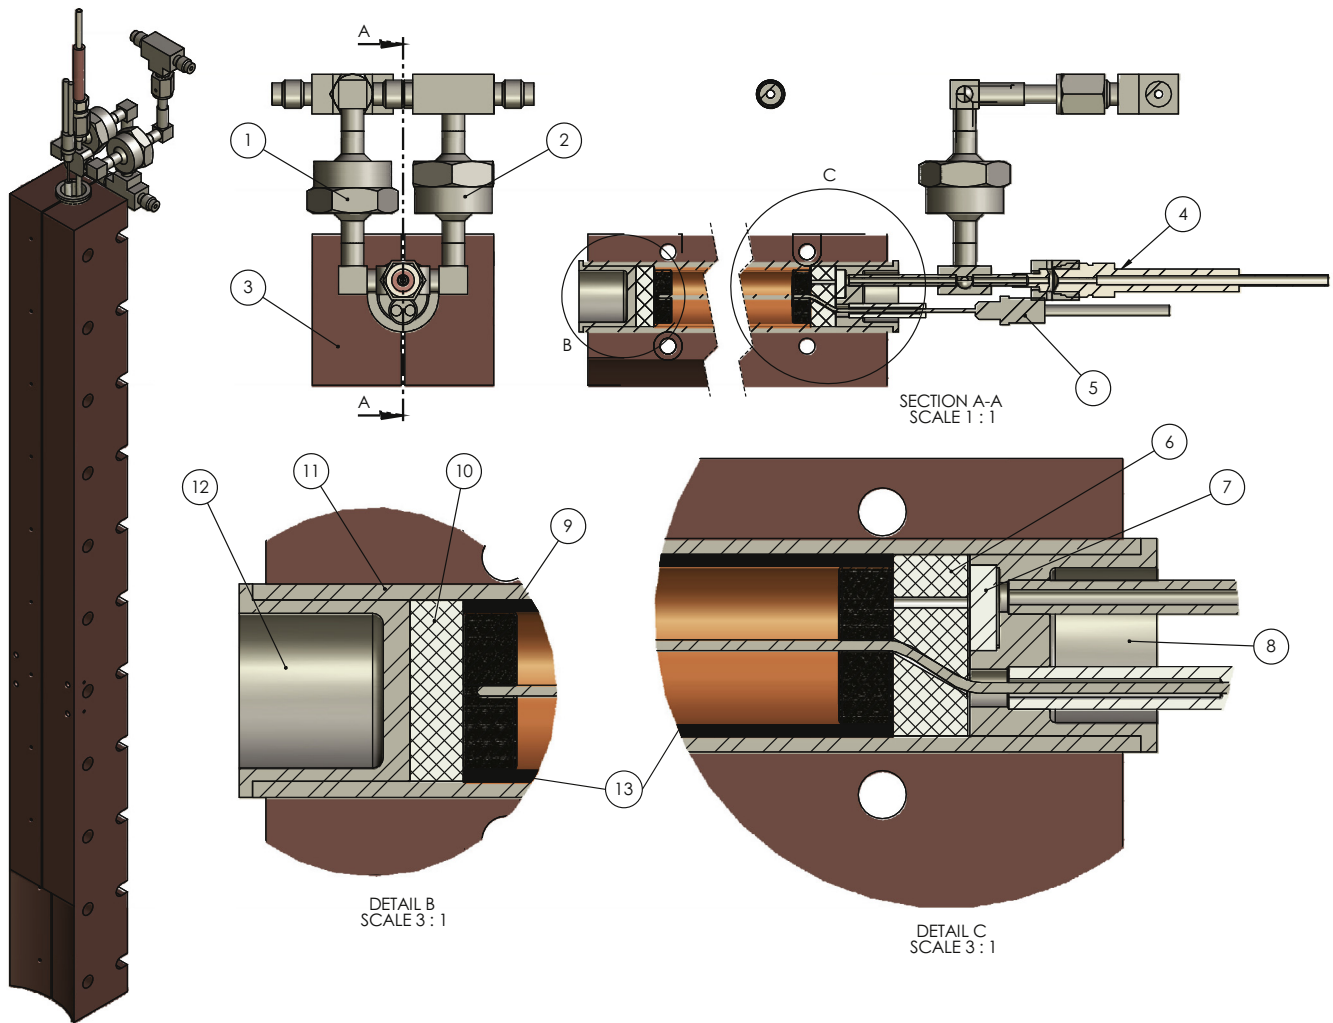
Detailed design of the helium sorption-compressor cell: 1 & 2. Check valves; 3. Heat-sink copper block; 4. Soft copper pinch-off; 5. Heater; 6 & 10. Teflon pills for insulating the ends; 7. Filter; 8 & 12. End caps of the container; 9. Carbon pill (only the first and the last pill are shown in the figure); 11. Container wall; 13. Kapton insulation layer.
